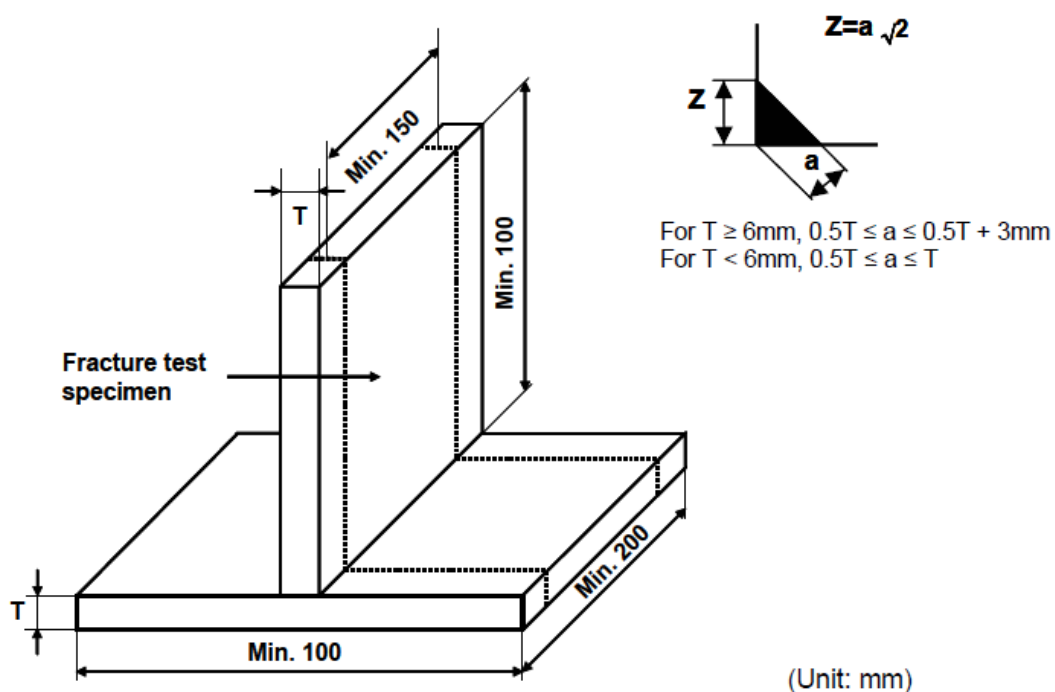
Dimensions and types of test assembly for fillet welds
